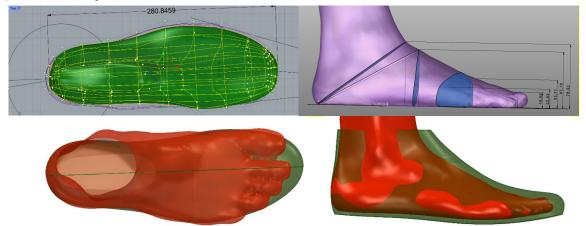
The Shoe Last Shape Designing with the Method of Reverse Engineering in a Graphic 3D Environment
